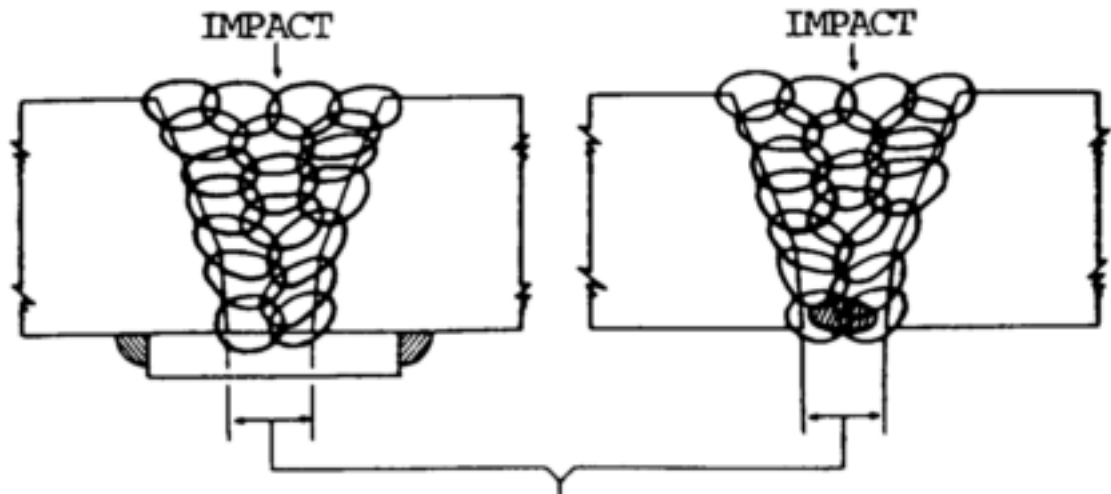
Common defects when welding root beads on homogenous armor plate and the remedial procedures.
